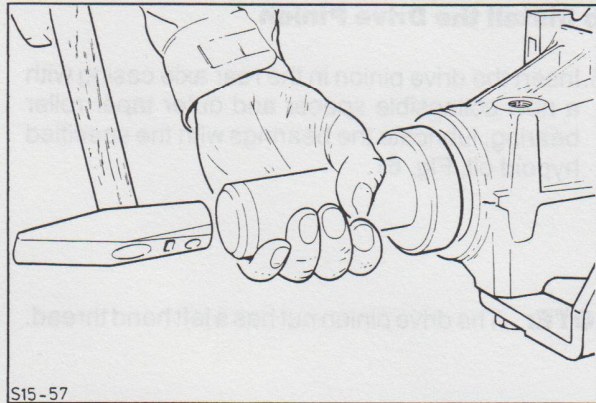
Replacing drive pinion oil seal using Special Tool 15-047-A.
